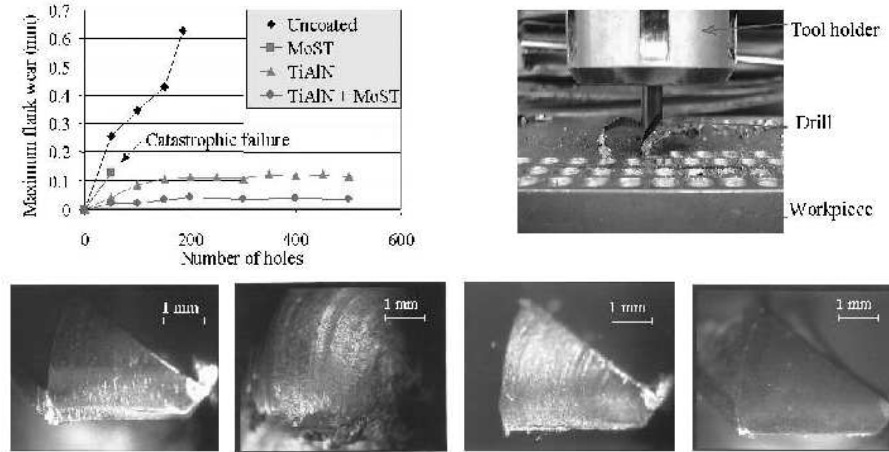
(a) Flank wear against number of holes at 40 m/min. (b) MoST coated drill failure at 40 m/min. (c) Uncoated (0.627 mm) after 185 holes, (d) MoST (catastrophic failure) after 54 holes, (e) TiAlN (0.116mm) after 500 holes and (f) TiAlN + MoST (0.036 mm) after 500 holes.
